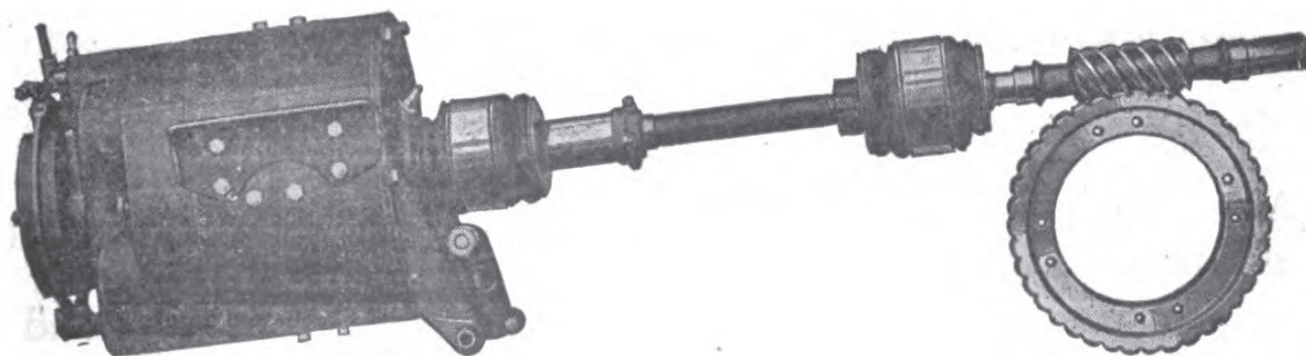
,082.—Baker R and L motor, propeller shaft, universal joints, worm and gear. This is the straight type top mounted worm drive.
